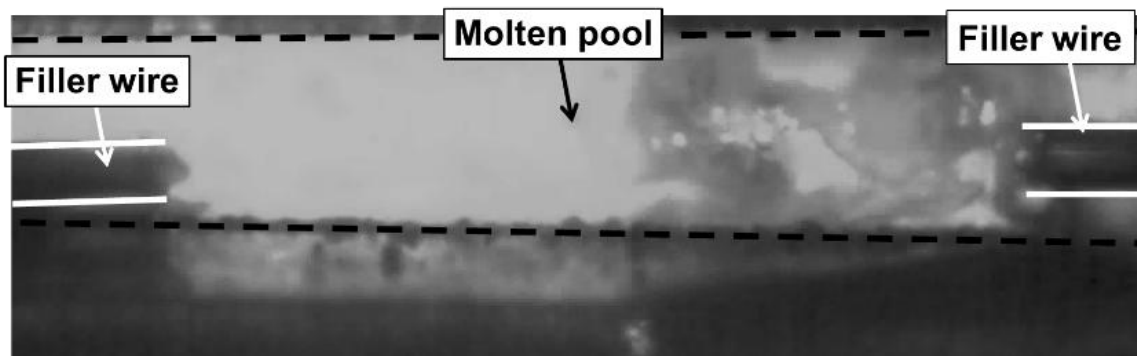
Weld pool was created by the large rectangular laser beam and hot-wire feeds. High speed image viewed perpendicular weld pool surface.
